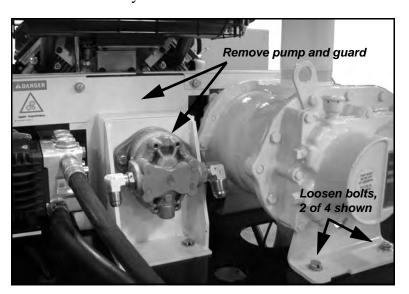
Loosen the four bolts holding the blower to the engine platform (two are shown). Remove the hydraulic pump and guard.
